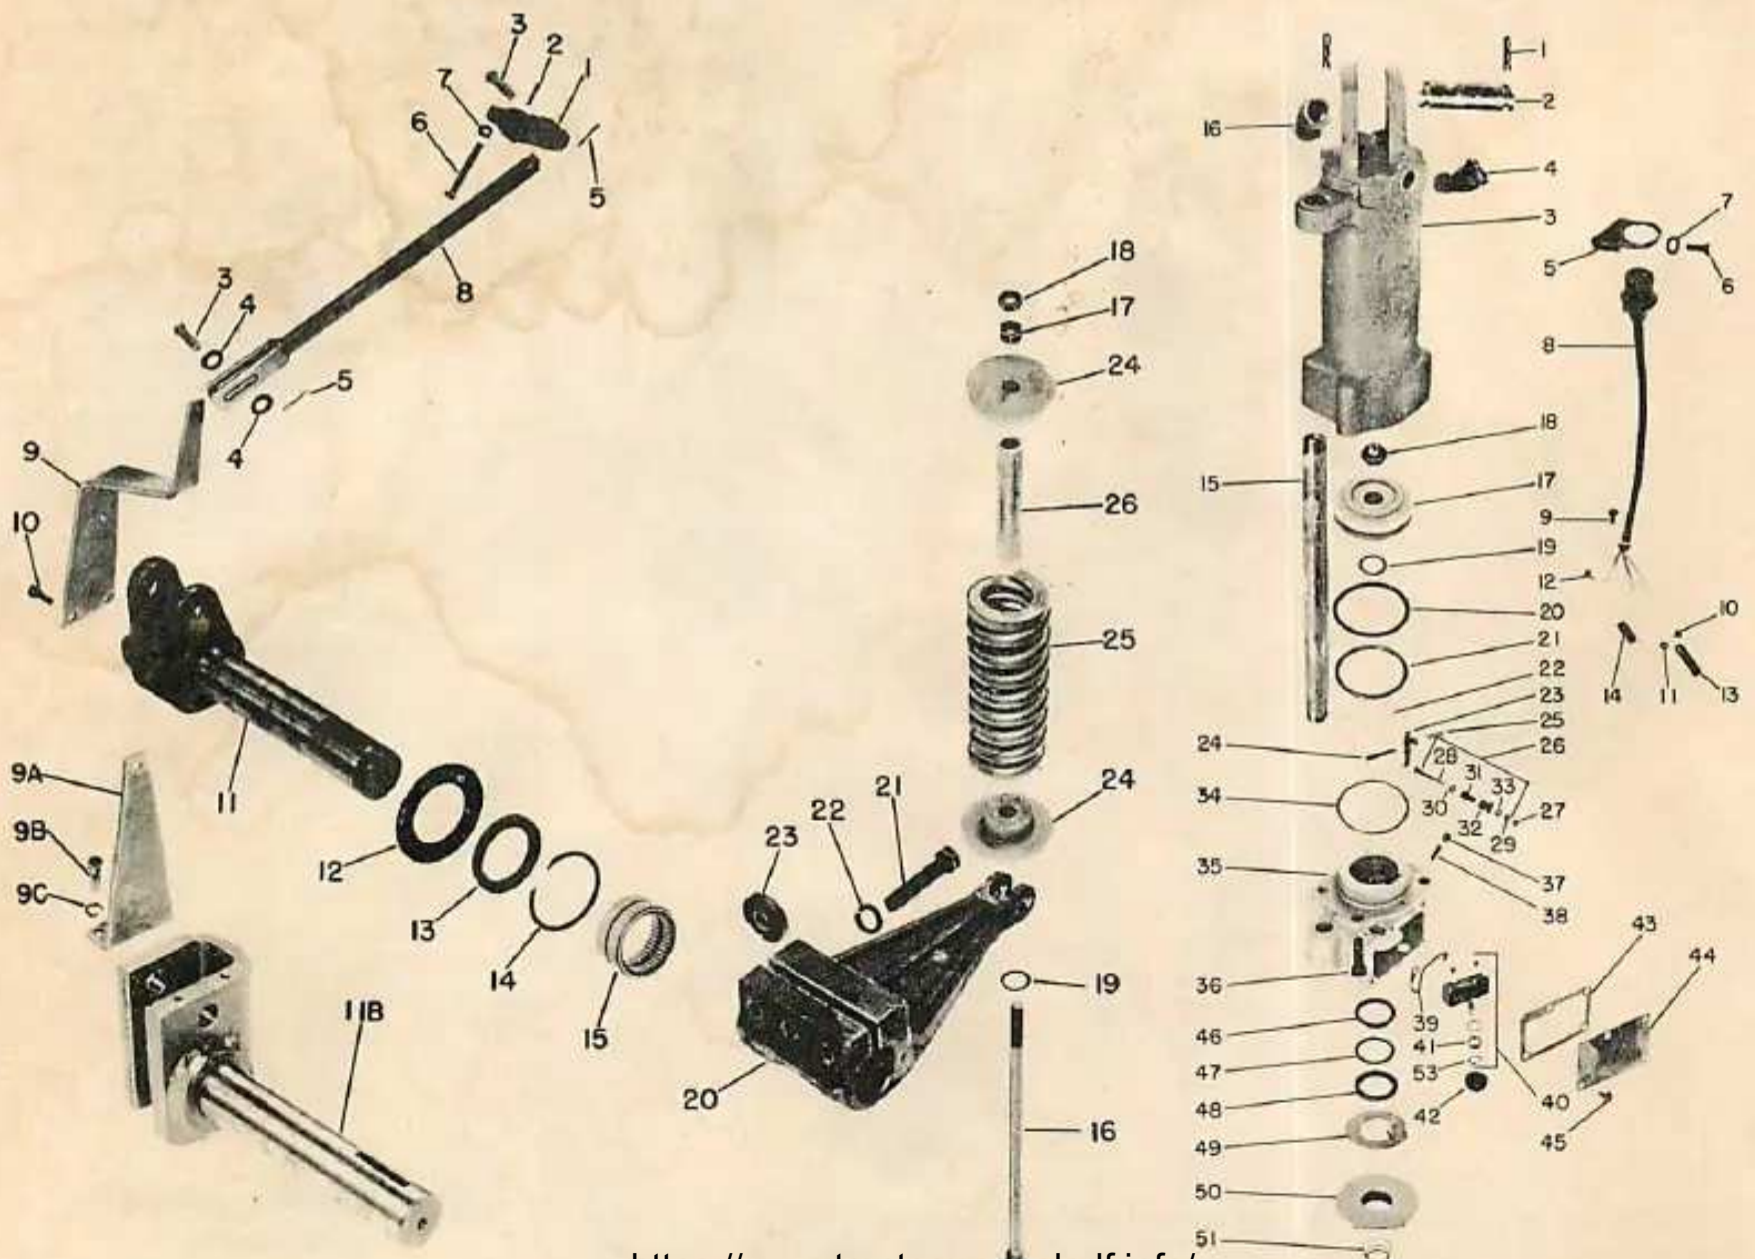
Exploded view of the draft control actuating assembly used on Utility models.
